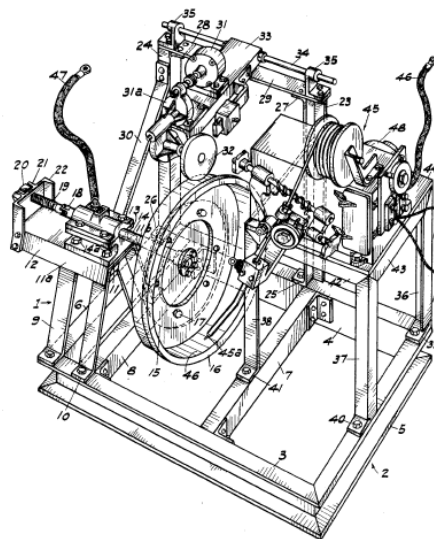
Perspective view of the wire and arc welding machine for reconditioning of worn brake drums (Shockey, 1932).
